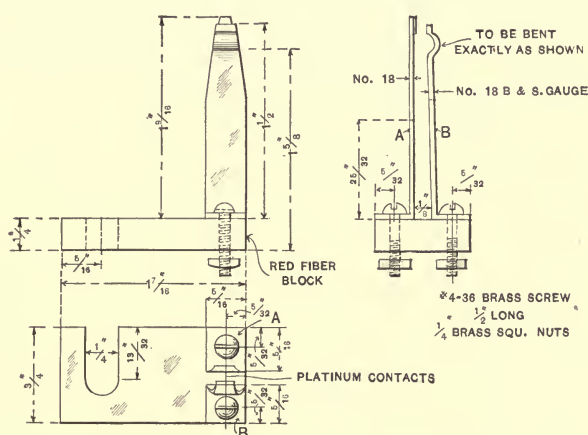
IGNITER CONTACTS AND FIBER BLOCK.
